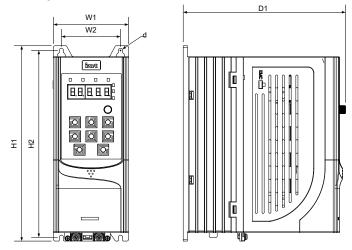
1.5-7.5kW VFD wall-mounting diagram
